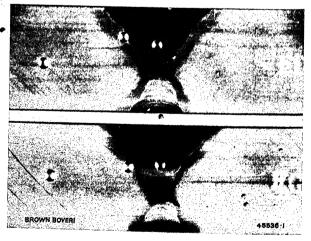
Macro-etching tests of a boiler welding (with Brinell hardness test). Full size.
